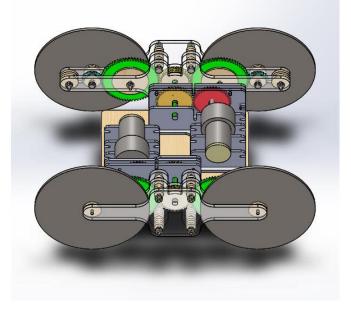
Raised side view of Mark 1 assembly (transparent gearbox upright to show gearbox gears).
